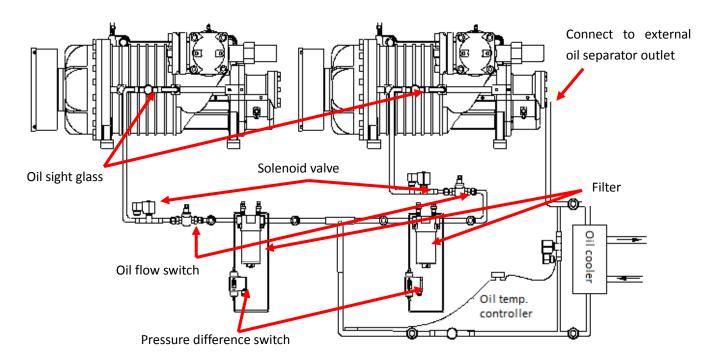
/410-PLUS-P Piping drawing of external oil cooling circuit
